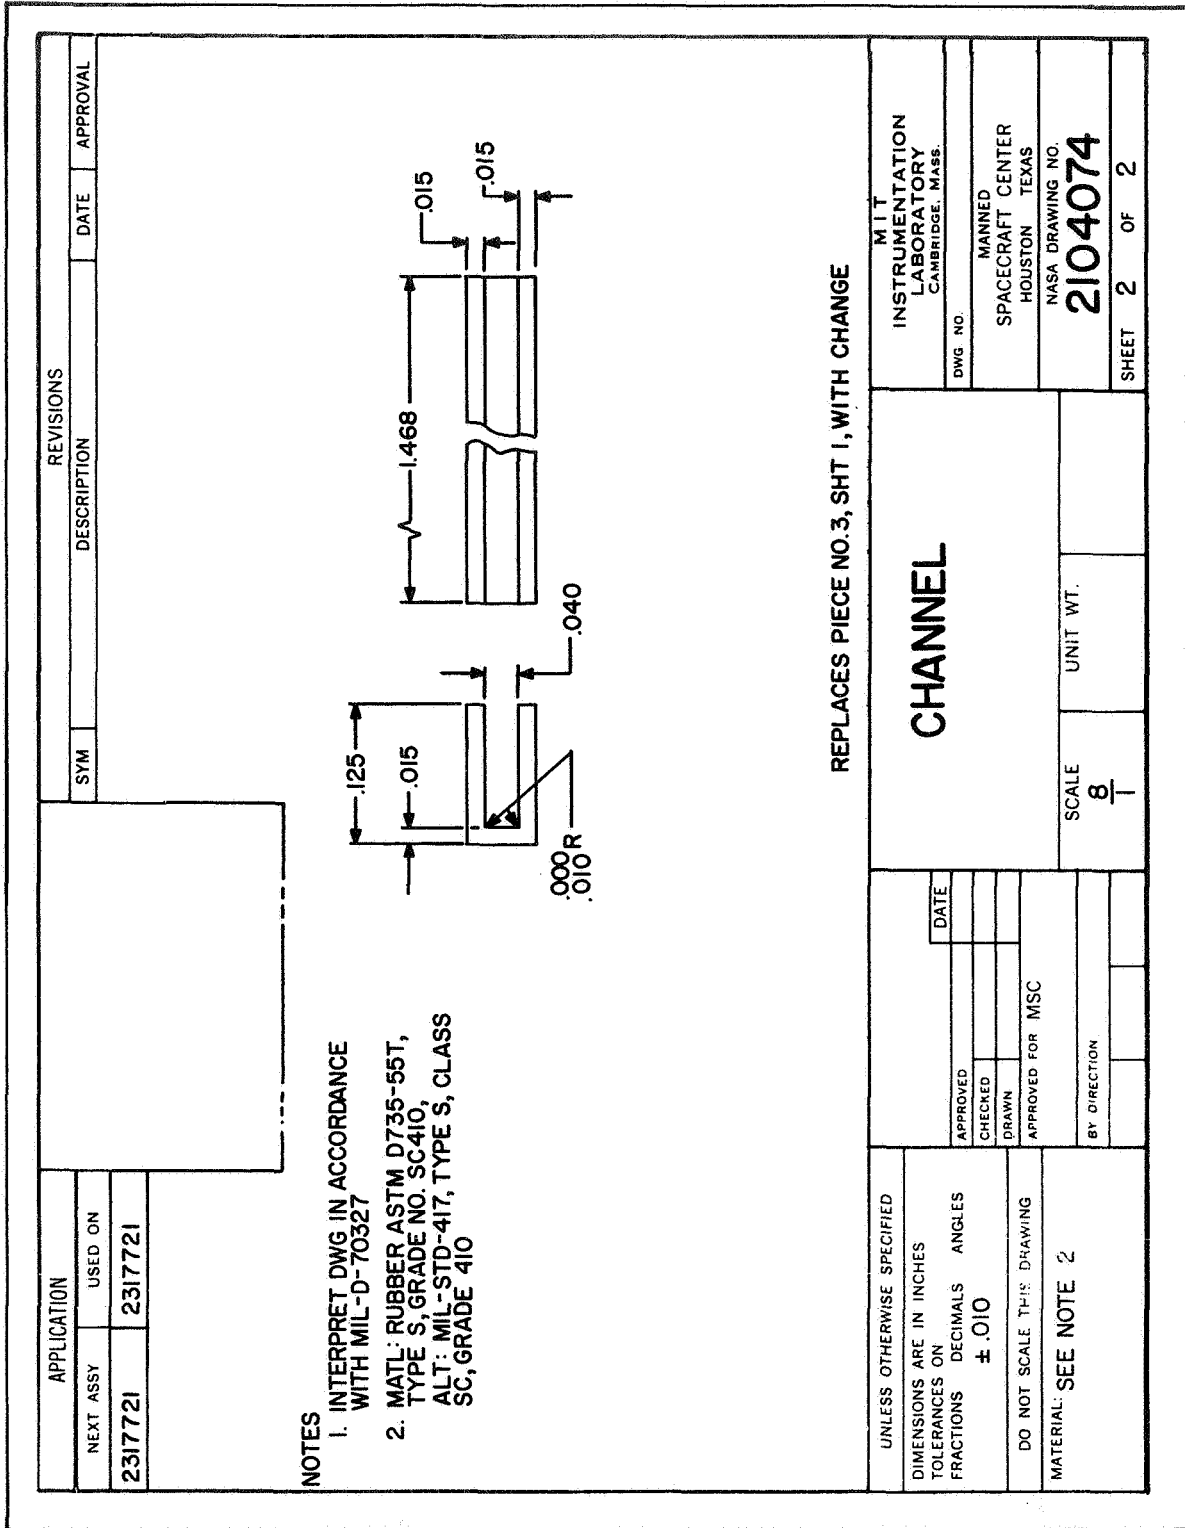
Sample Revision Showing Drawing to Replace One Detail of Figure 15-11 With Change.
